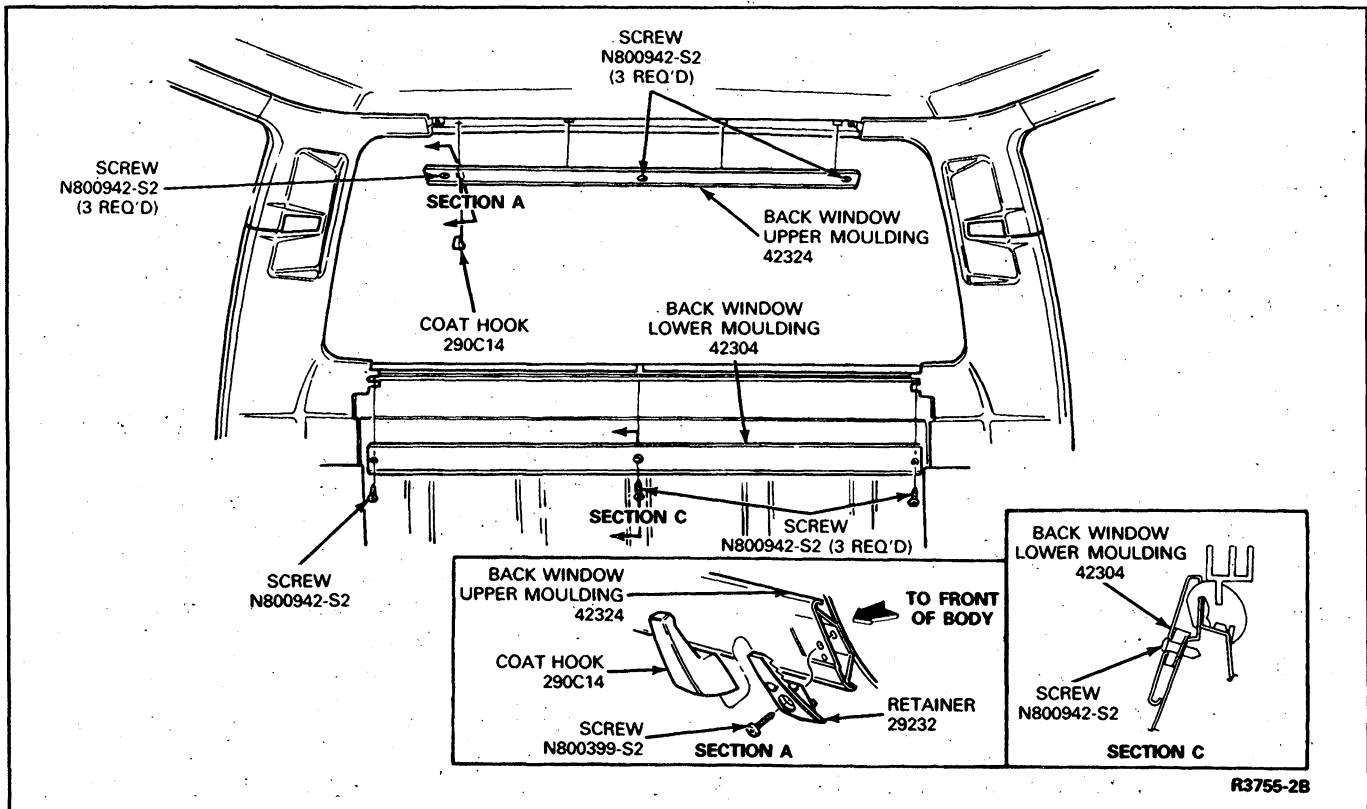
Back Window Moulding and Coat Hook—F-350 Crew Cab
